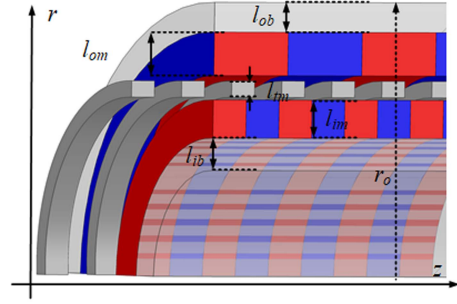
Cross-sectional dimensional parameters of SM-MMLS.
